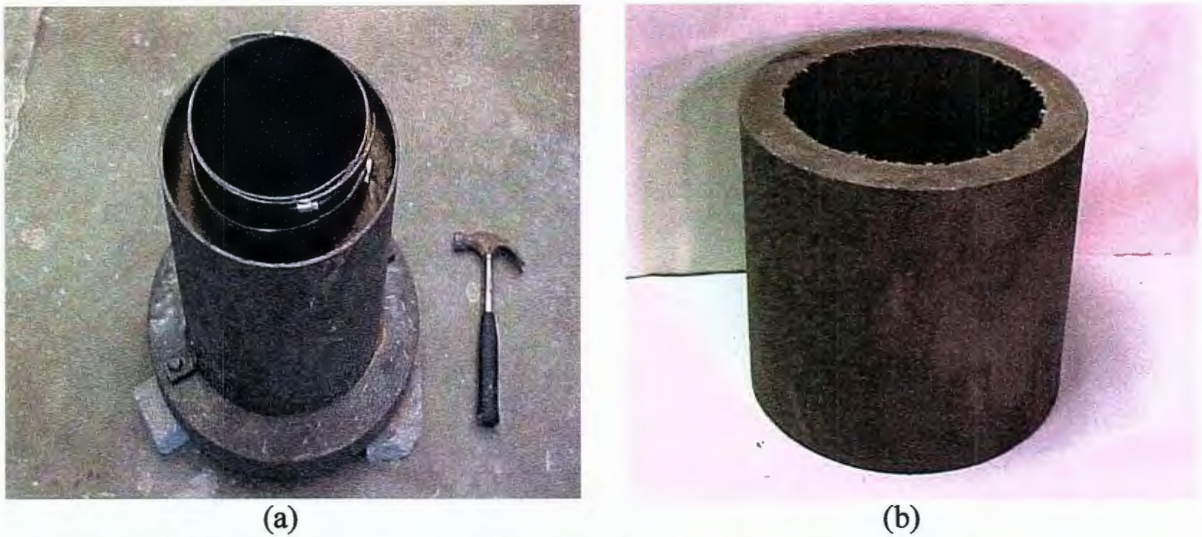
(a) Pipe specimens cooling, (b) pipe specimen
